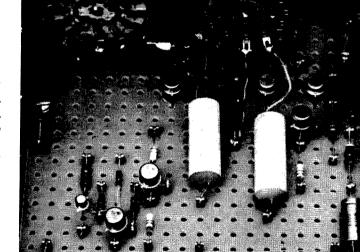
Circuit board used in the pulse generator shown in Fig. 7. All components are mounted on this board except the power supply.
